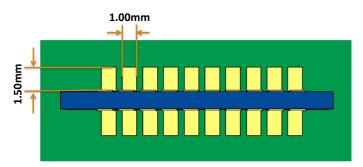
Recommended user mounting pads to mate with BGMS' TOP and BOTTOM LGA Slot-In mounting type of Client baseband or motherboard
